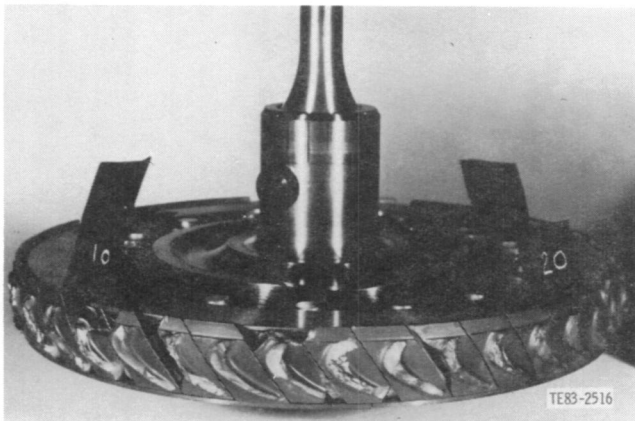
Gasifier turbine rotor C-4, TD13, blades No. 10 through 20 of 40 total.
